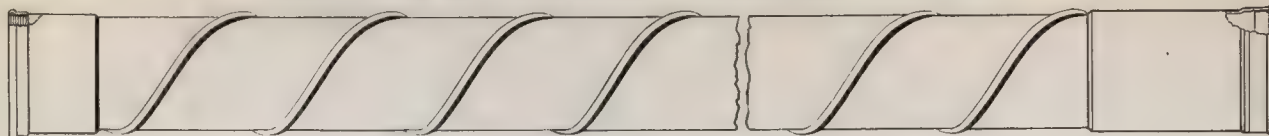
Sectional drawing of Naylor Spiralweld Surface Casing.
